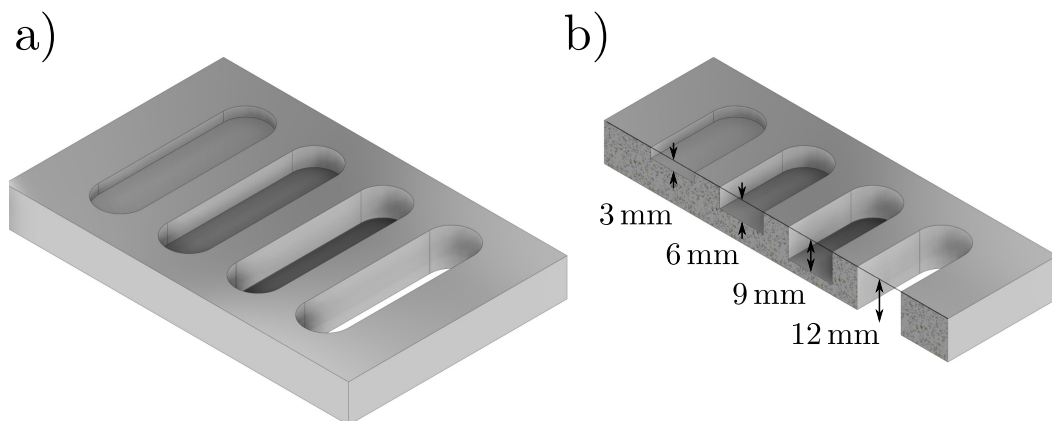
CAD drawing (a) with cross-sectional view (b) of the multi-recess Al target to show the dimensions of the corrosion slots.
